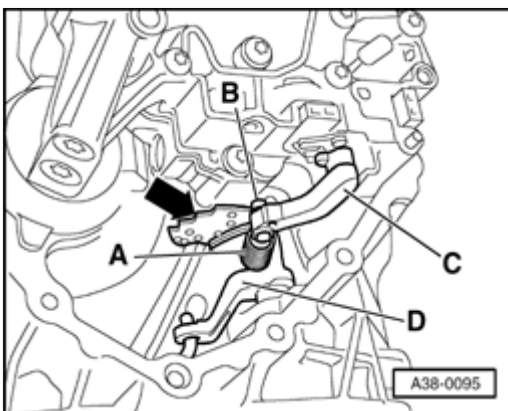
Identifying Catch Of Selector Shaft, Spring & Roller
